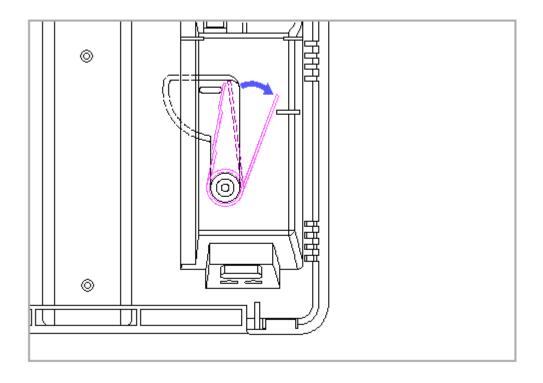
Installing the Horizontal Guide (Power Switch Side)
